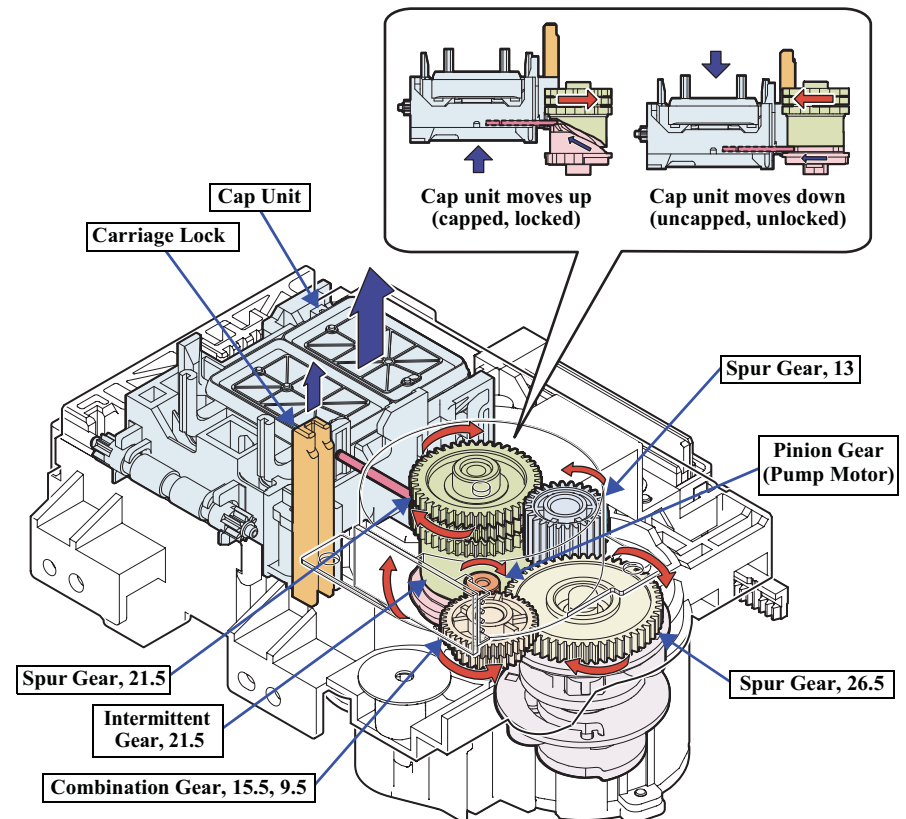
Cap Unit/Carriage Lock Mechanism
